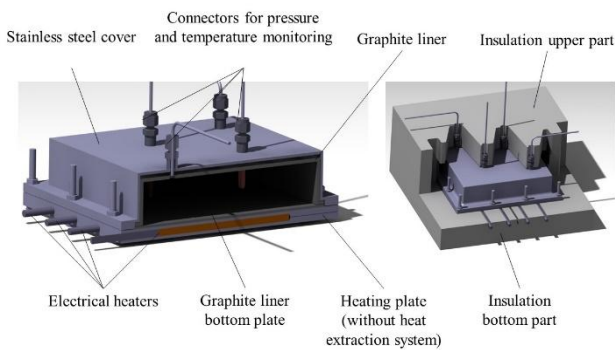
3D CAD model of the storage prototype without heat extraction system in sectional view (left) and with part of the insulation (right).
